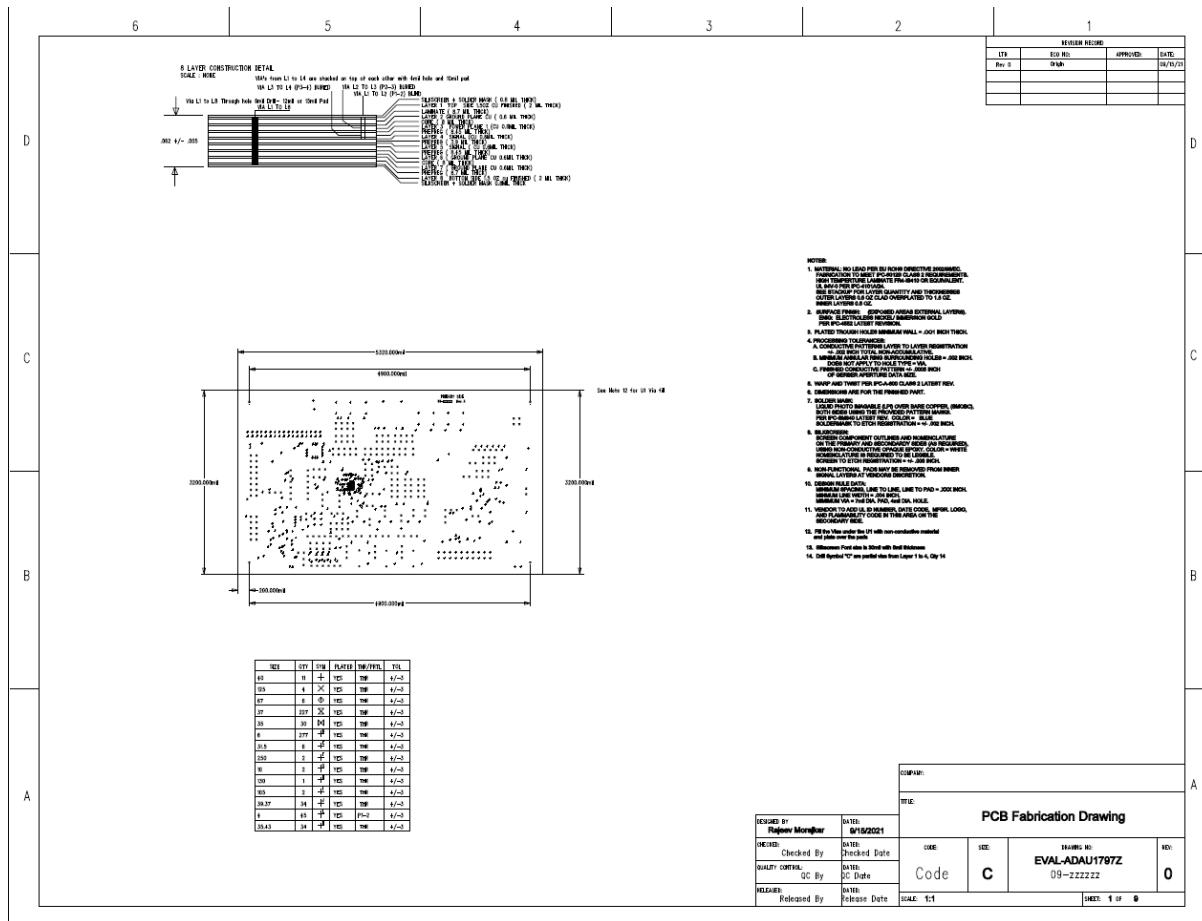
EVAL-ADAU1797Z Layout: Fab Drawing
